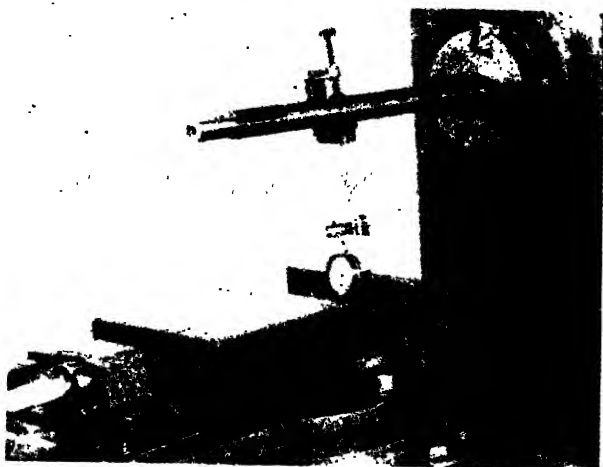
Aligning the solid jaw of the vise parallel with the cut by means of a dial indicator clamped to the machine arbor.
